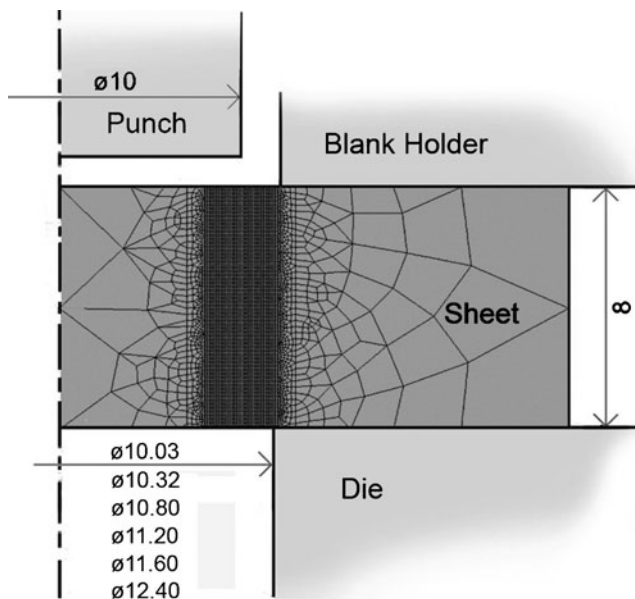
Axisymmetric punching model showing the clearances analyzed (dimensions in millimeters)
